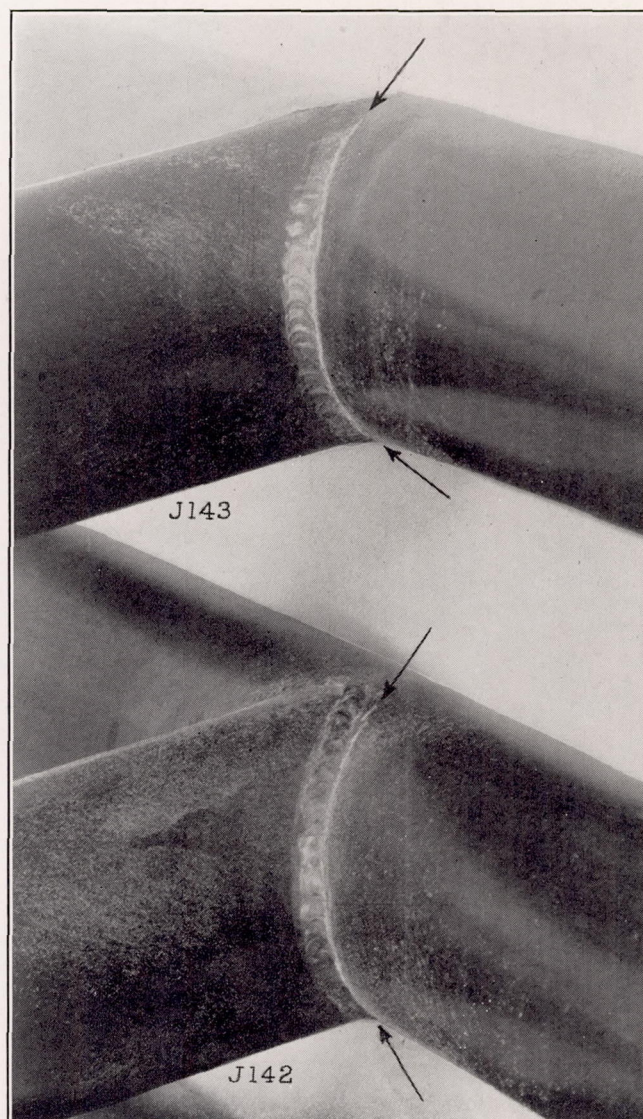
Cracks in T joints made with thin-walled tubing ($1\frac{1}{2}$ in. O. D. by 0.020 in. wall) as indicated in the magnetic powder inspection. Low-carbon welding rod and a neutral flame were used in welding these two joints.
